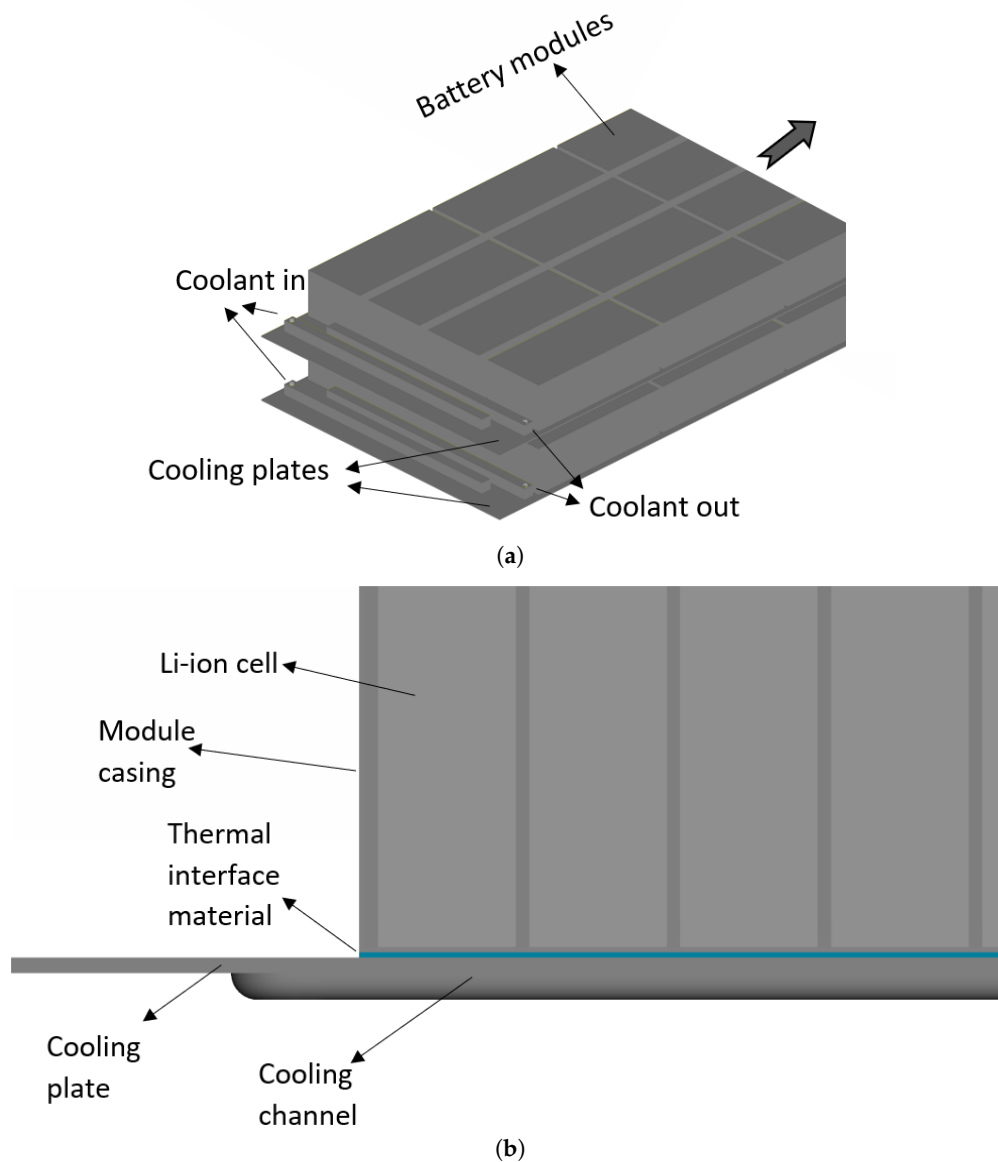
3D representation of the battery pack: (a) isometric view; (b) Cross-sectional view of the module assembly.
